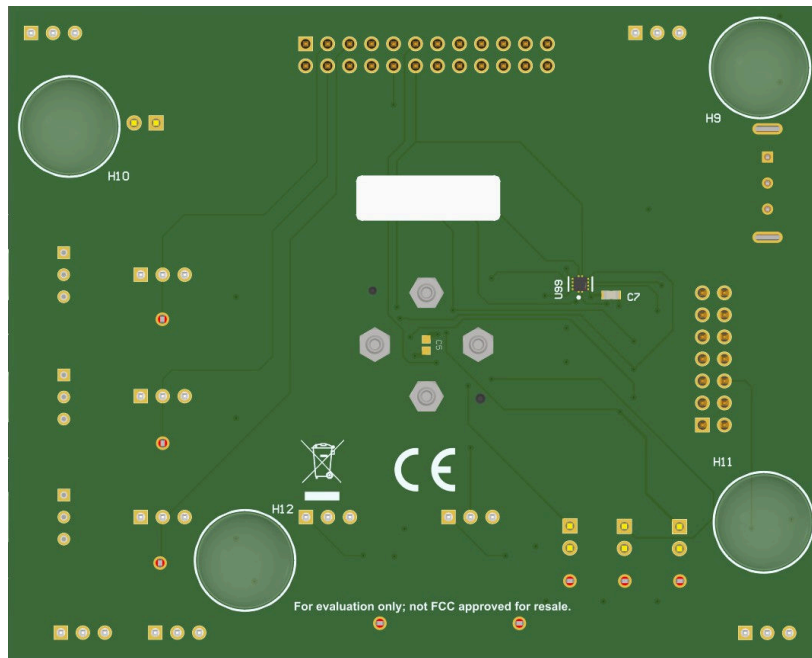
TPLD1201-RWB-EVM Board Bottom
